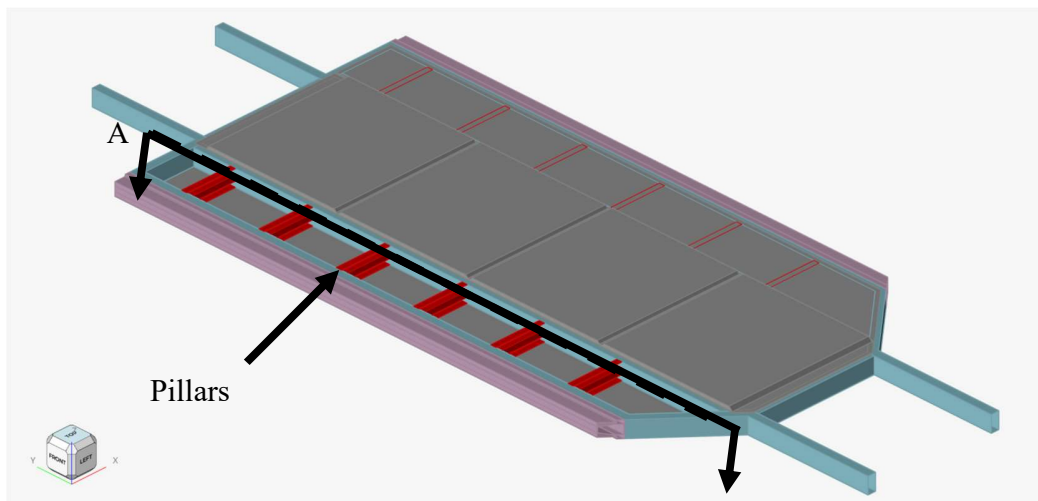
Isometric view of the proposed design with a cross-section A
